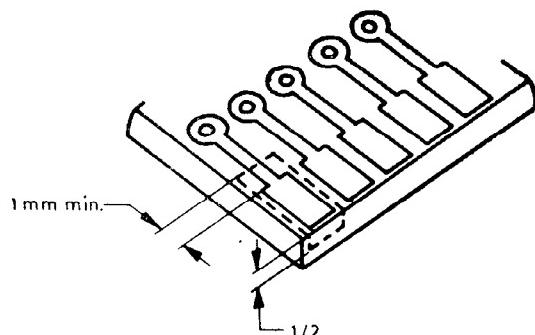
PRINTED EDGE CONNECTOR — CONTACT REPLACEMENT METHOD
